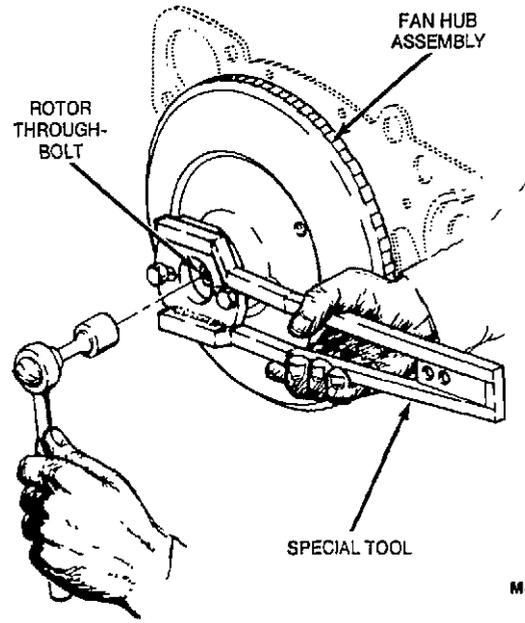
SECURING FAN HUB ASSEMBLY FOR REMOVAL
